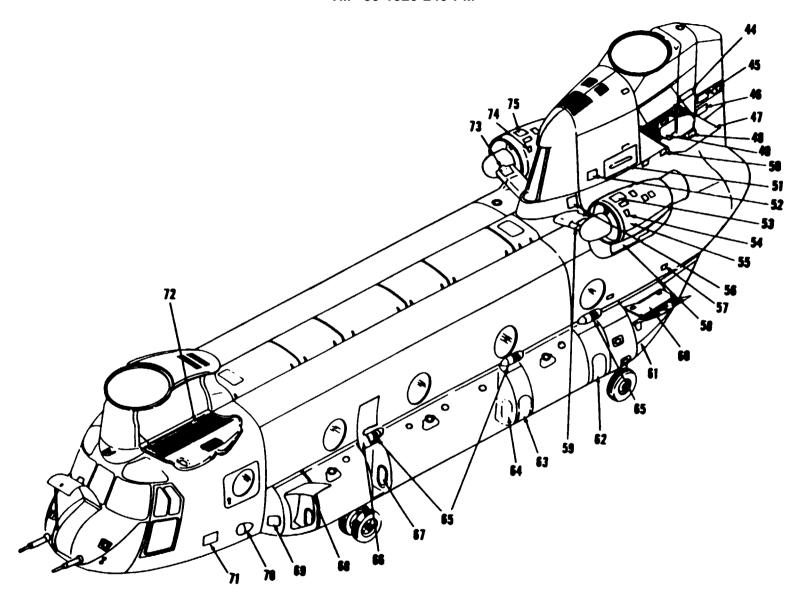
Access Doors, Covers, and Panels (Sheet 2 of 4)
